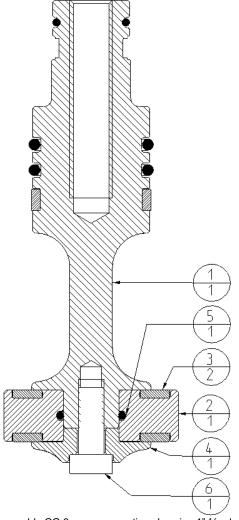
Spool assembly CO 3 way pneumatic valve size 1" 1/2: aluminum machining
